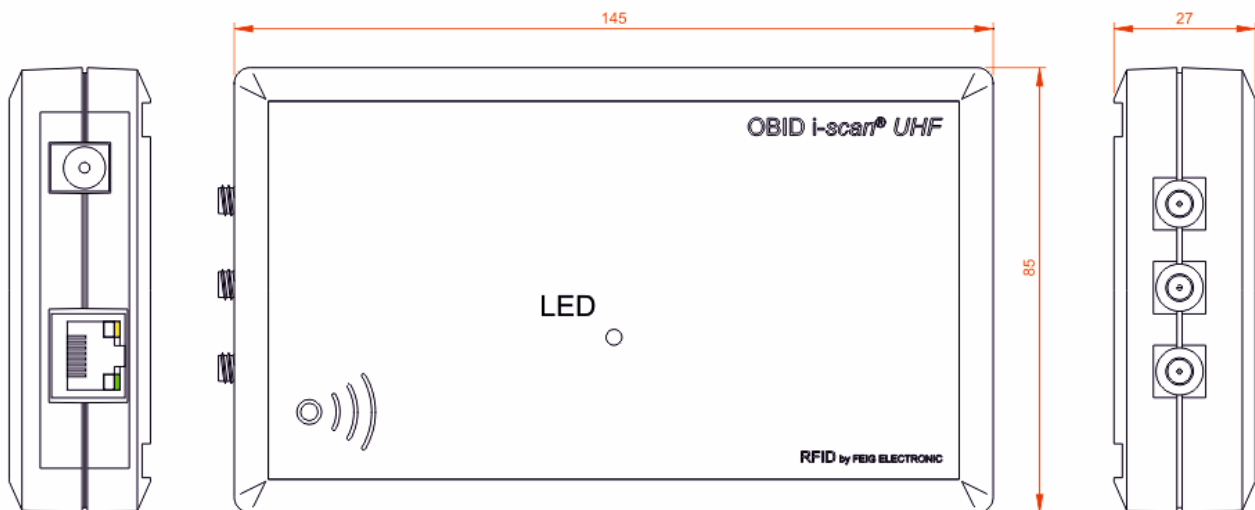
Viewing and Dimensions ID ISC.MRU102-POE (all dimensions in mm)
